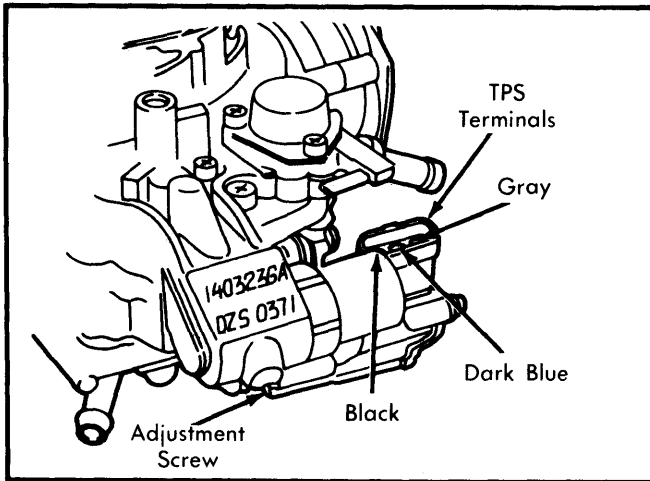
TPS Adjustment Screw Location for 1.6L Engine
